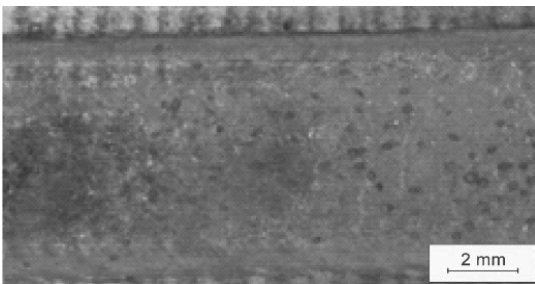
View of the MCMgAl9Zn1 cast magnesium alloy face of weld after laser treatment with WC powder, scan rate: 0.5 m/min, laser power: 2.0 kW
